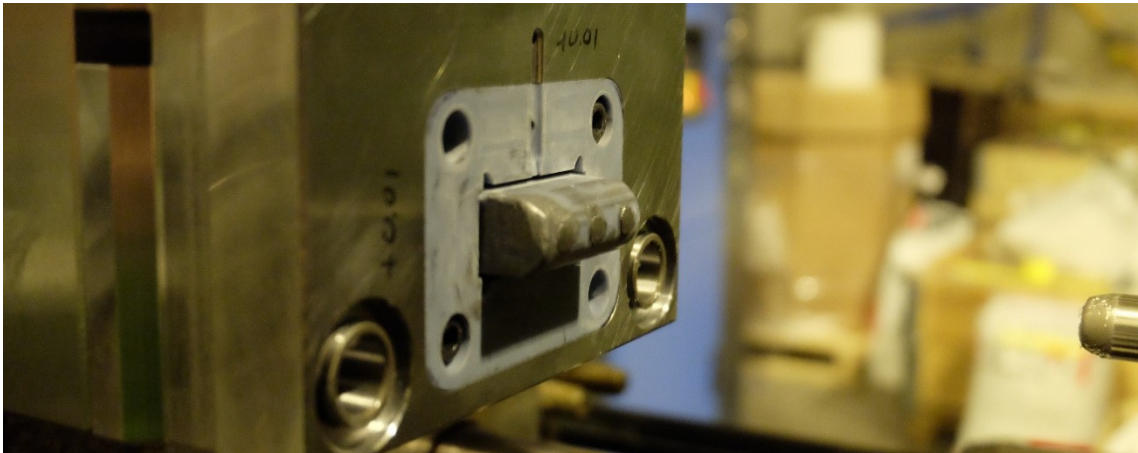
AM IM insert fitted to the mold platen. The edges of the insert needed to be fixed with some metallic paste because they were cracked during the drilling of the ejector pin holes.
